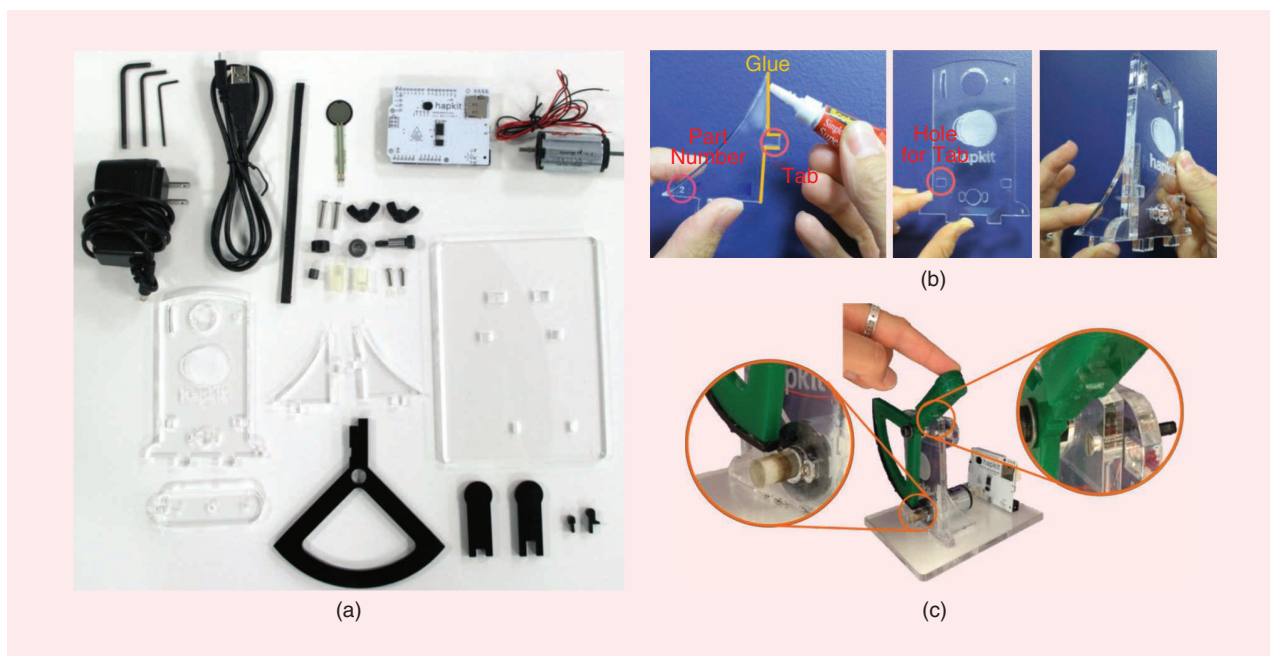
(a) The Hapkit components, including laser-cut acrylic pieces, 3D-printed parts, custom PCB, motor, various nuts and screws, power supply, micro-USB cable, and tools needed for assembly. (b) The simple assembly process features laser-etched numbers on each acrylic piece along with a series of tabs and slots to enable easy connection of corresponding pieces. (c) The handle stop is designed to prevent the sector pulley from continuous rotation that would otherwise cause the handle to collide with the spinning motor and break.
